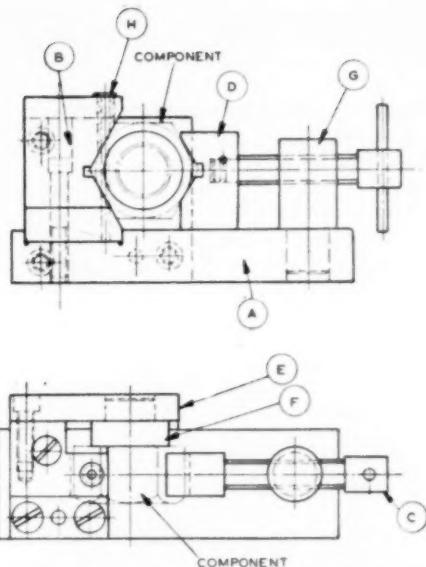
This jig offers support to the drill and ensures true and easy start. Clamping is simple and the location is easily cleaned of swarf and coolant.
